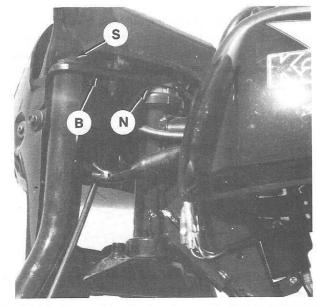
View of steering head assembly. Rotate slotted nut (N) to adjust steering play.
